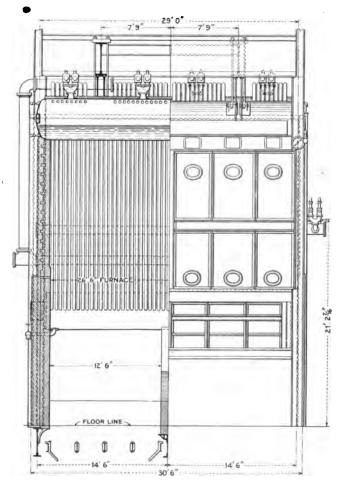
Large water-tube boiler installed by the Detroit Edison Co. (Side Elevation).
